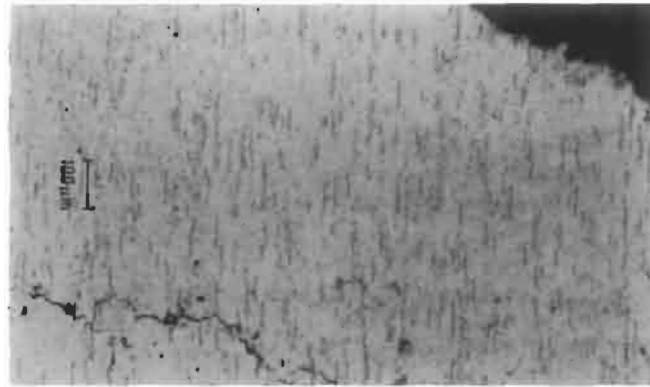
Fractured pin C. Note the intergranular nature of the fracture surface on the bottom left, and the crack running parallel to the main fracture. The ferrite stringers can also be seen.
